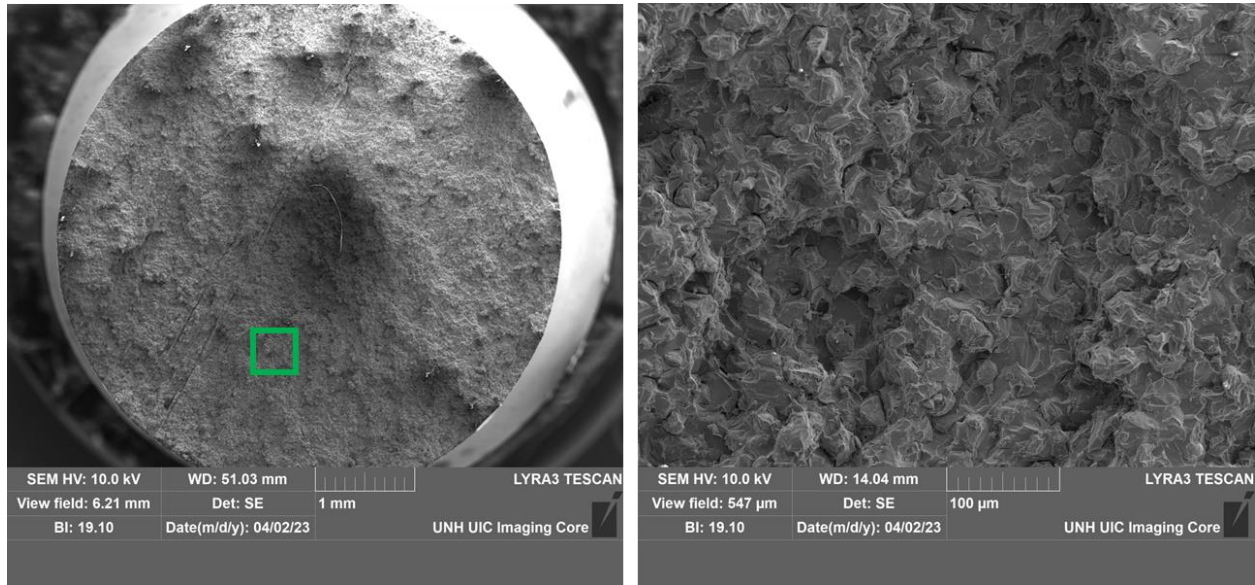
Secondary electron images showing the fracture surface for a specimen pulled in tension to fracture along RD.
